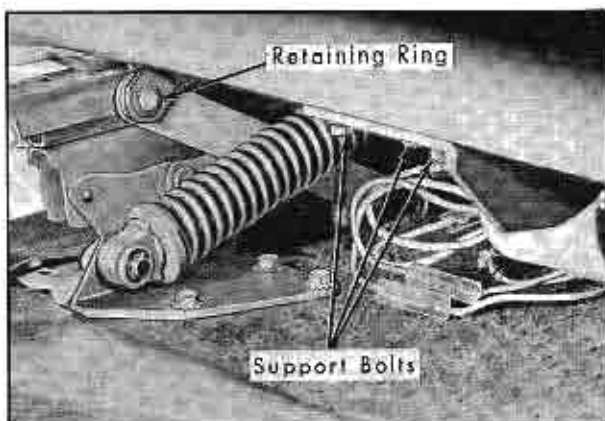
Detaching Horizontal Equalizing Rod Links (Sedans)
